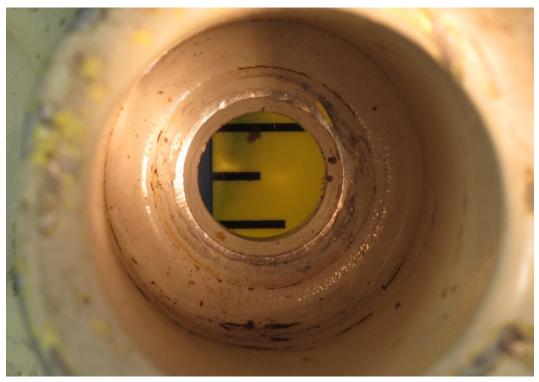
The recessed bolt hole for bolt P/N MS2150-10014 (missing), showing circumferential wear on the outboard side.
